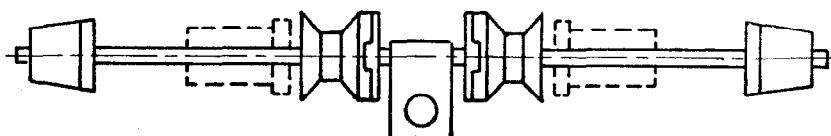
SYMMETRICAL DOUBLE CABLE-LIFTER WINDLASS WITH ROPE DRUM, TYPE 6
